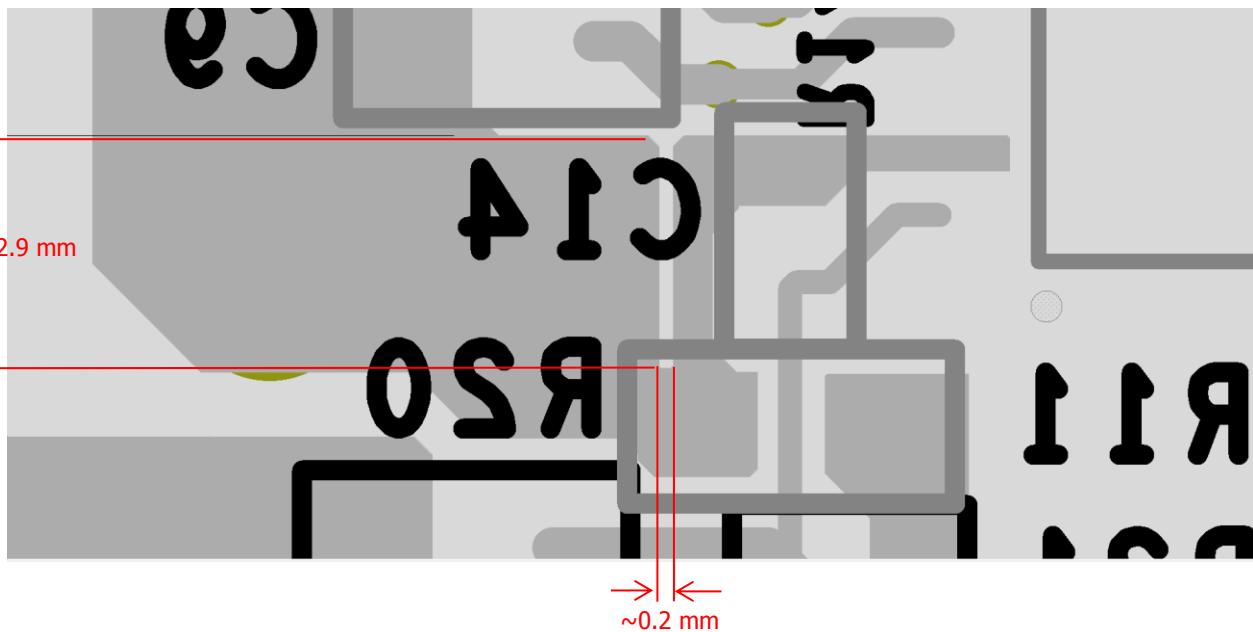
Modification 2; Etching Away of Copper on Printed Circuit Board Image, Bottom. Kelvin Sensing from GND Pin to Sense Resistor R11.
